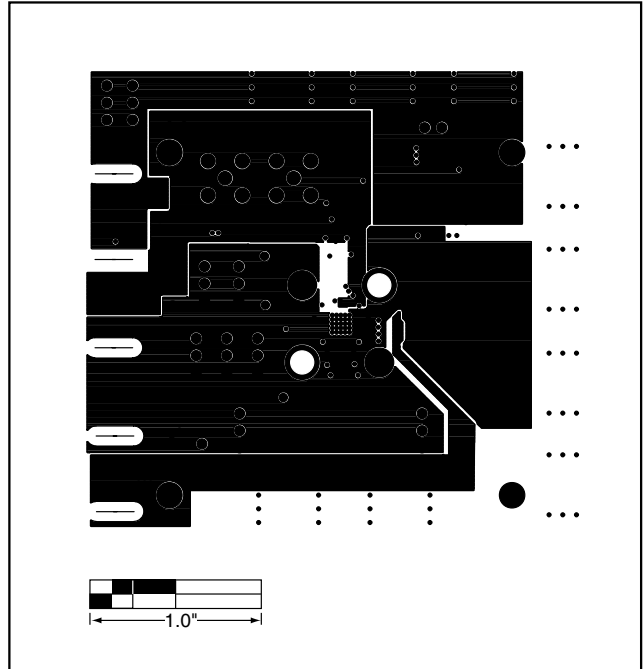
MAX3670 EV Kit PC Board Layout—Power Plane
